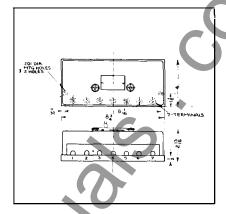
Outline Dimensions and Drilling Plan for Phase Shifting Transformer used with 3-phase, 3-wire Varmeter.
